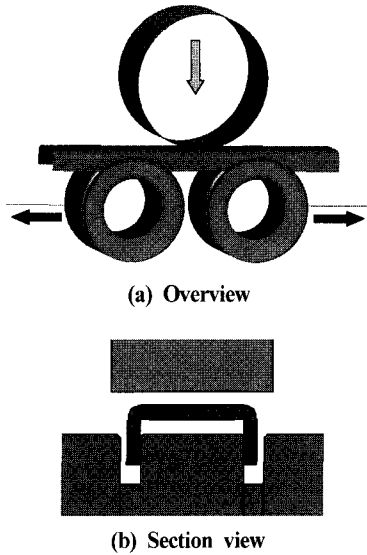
Schematic diagram of current tool set for U-bending of Steel-Cu blank
